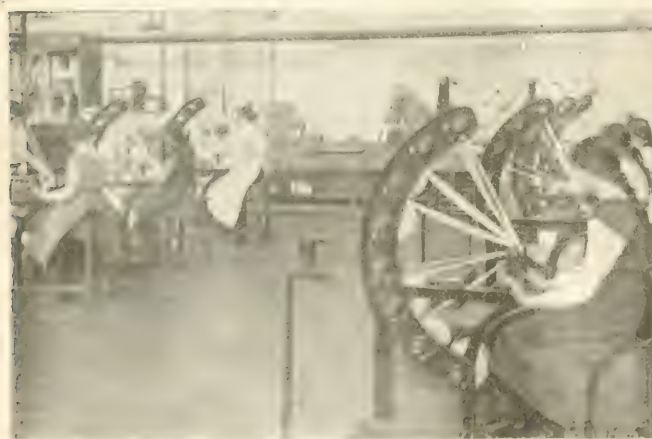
MACHINE FOR MANUFACTURING CONDENSERS.
